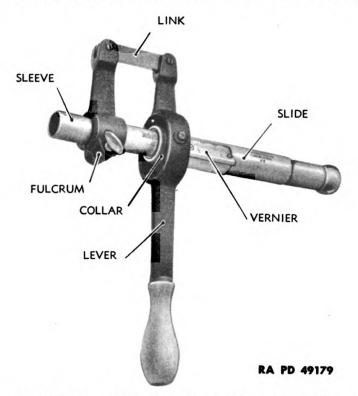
Handle, with Slide, Assembly (2-inch Star Gage)
